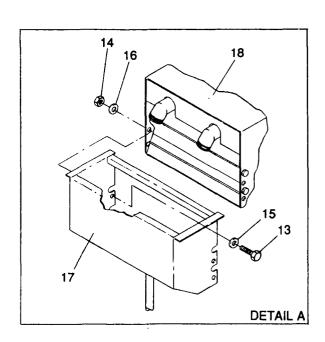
Top Panel Assembly and Exhaust Plenum, Removal and Installation
